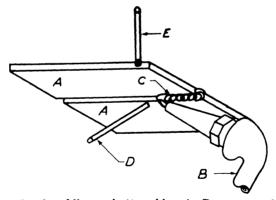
Overhead welding a butt weld: A. Parent metal, B. Torch, C. Bead, D. Filler rod, E. Parent metal holder
